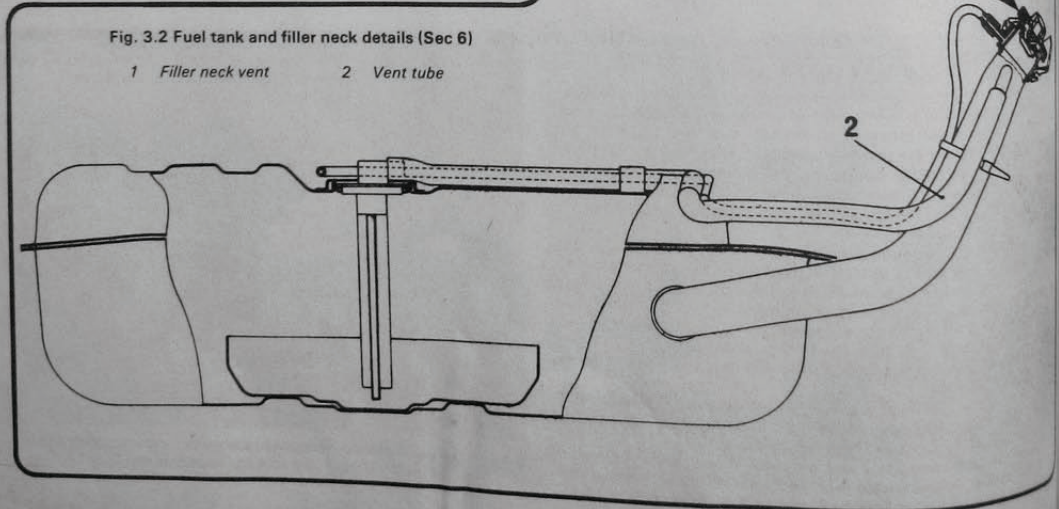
Fuel tank and filler neck details (Sec 6)
